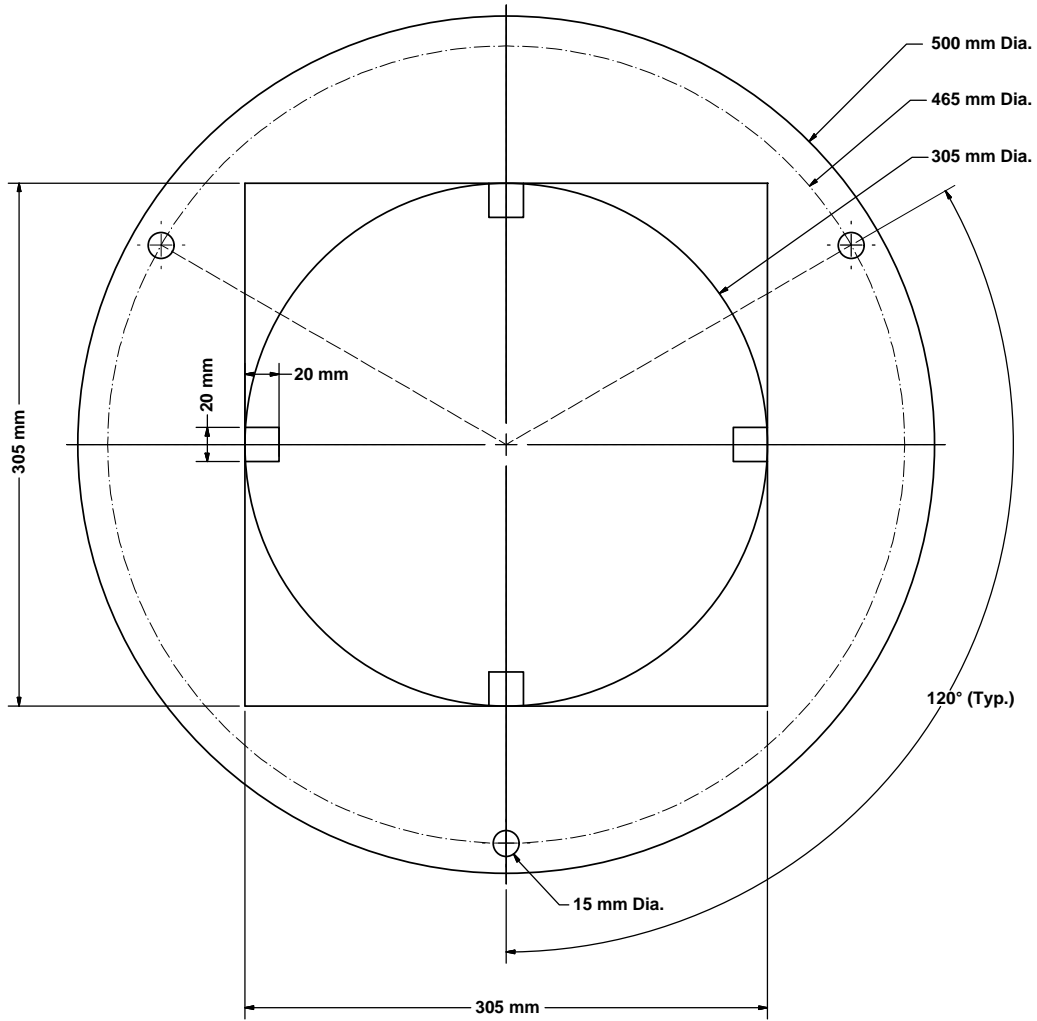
Technical drawing of NIST and NPL specimens for waterjet cutting.
